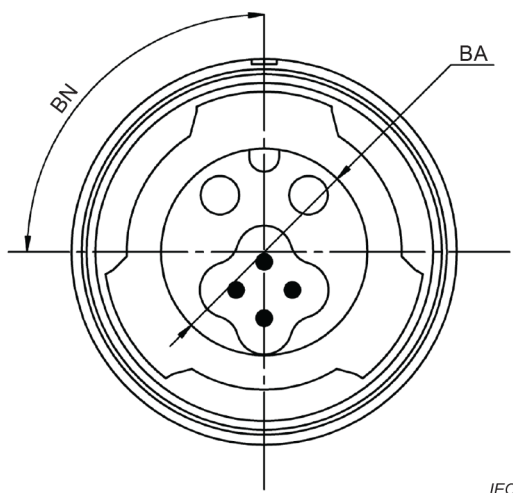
Front view of the female side of the push-pull housing for Type 1
